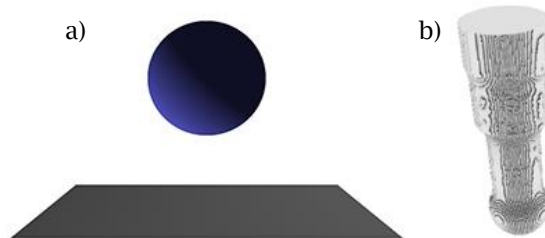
a) NURBS models of the sphere-like tool and the workpiece b) Voxel model of the tool.
